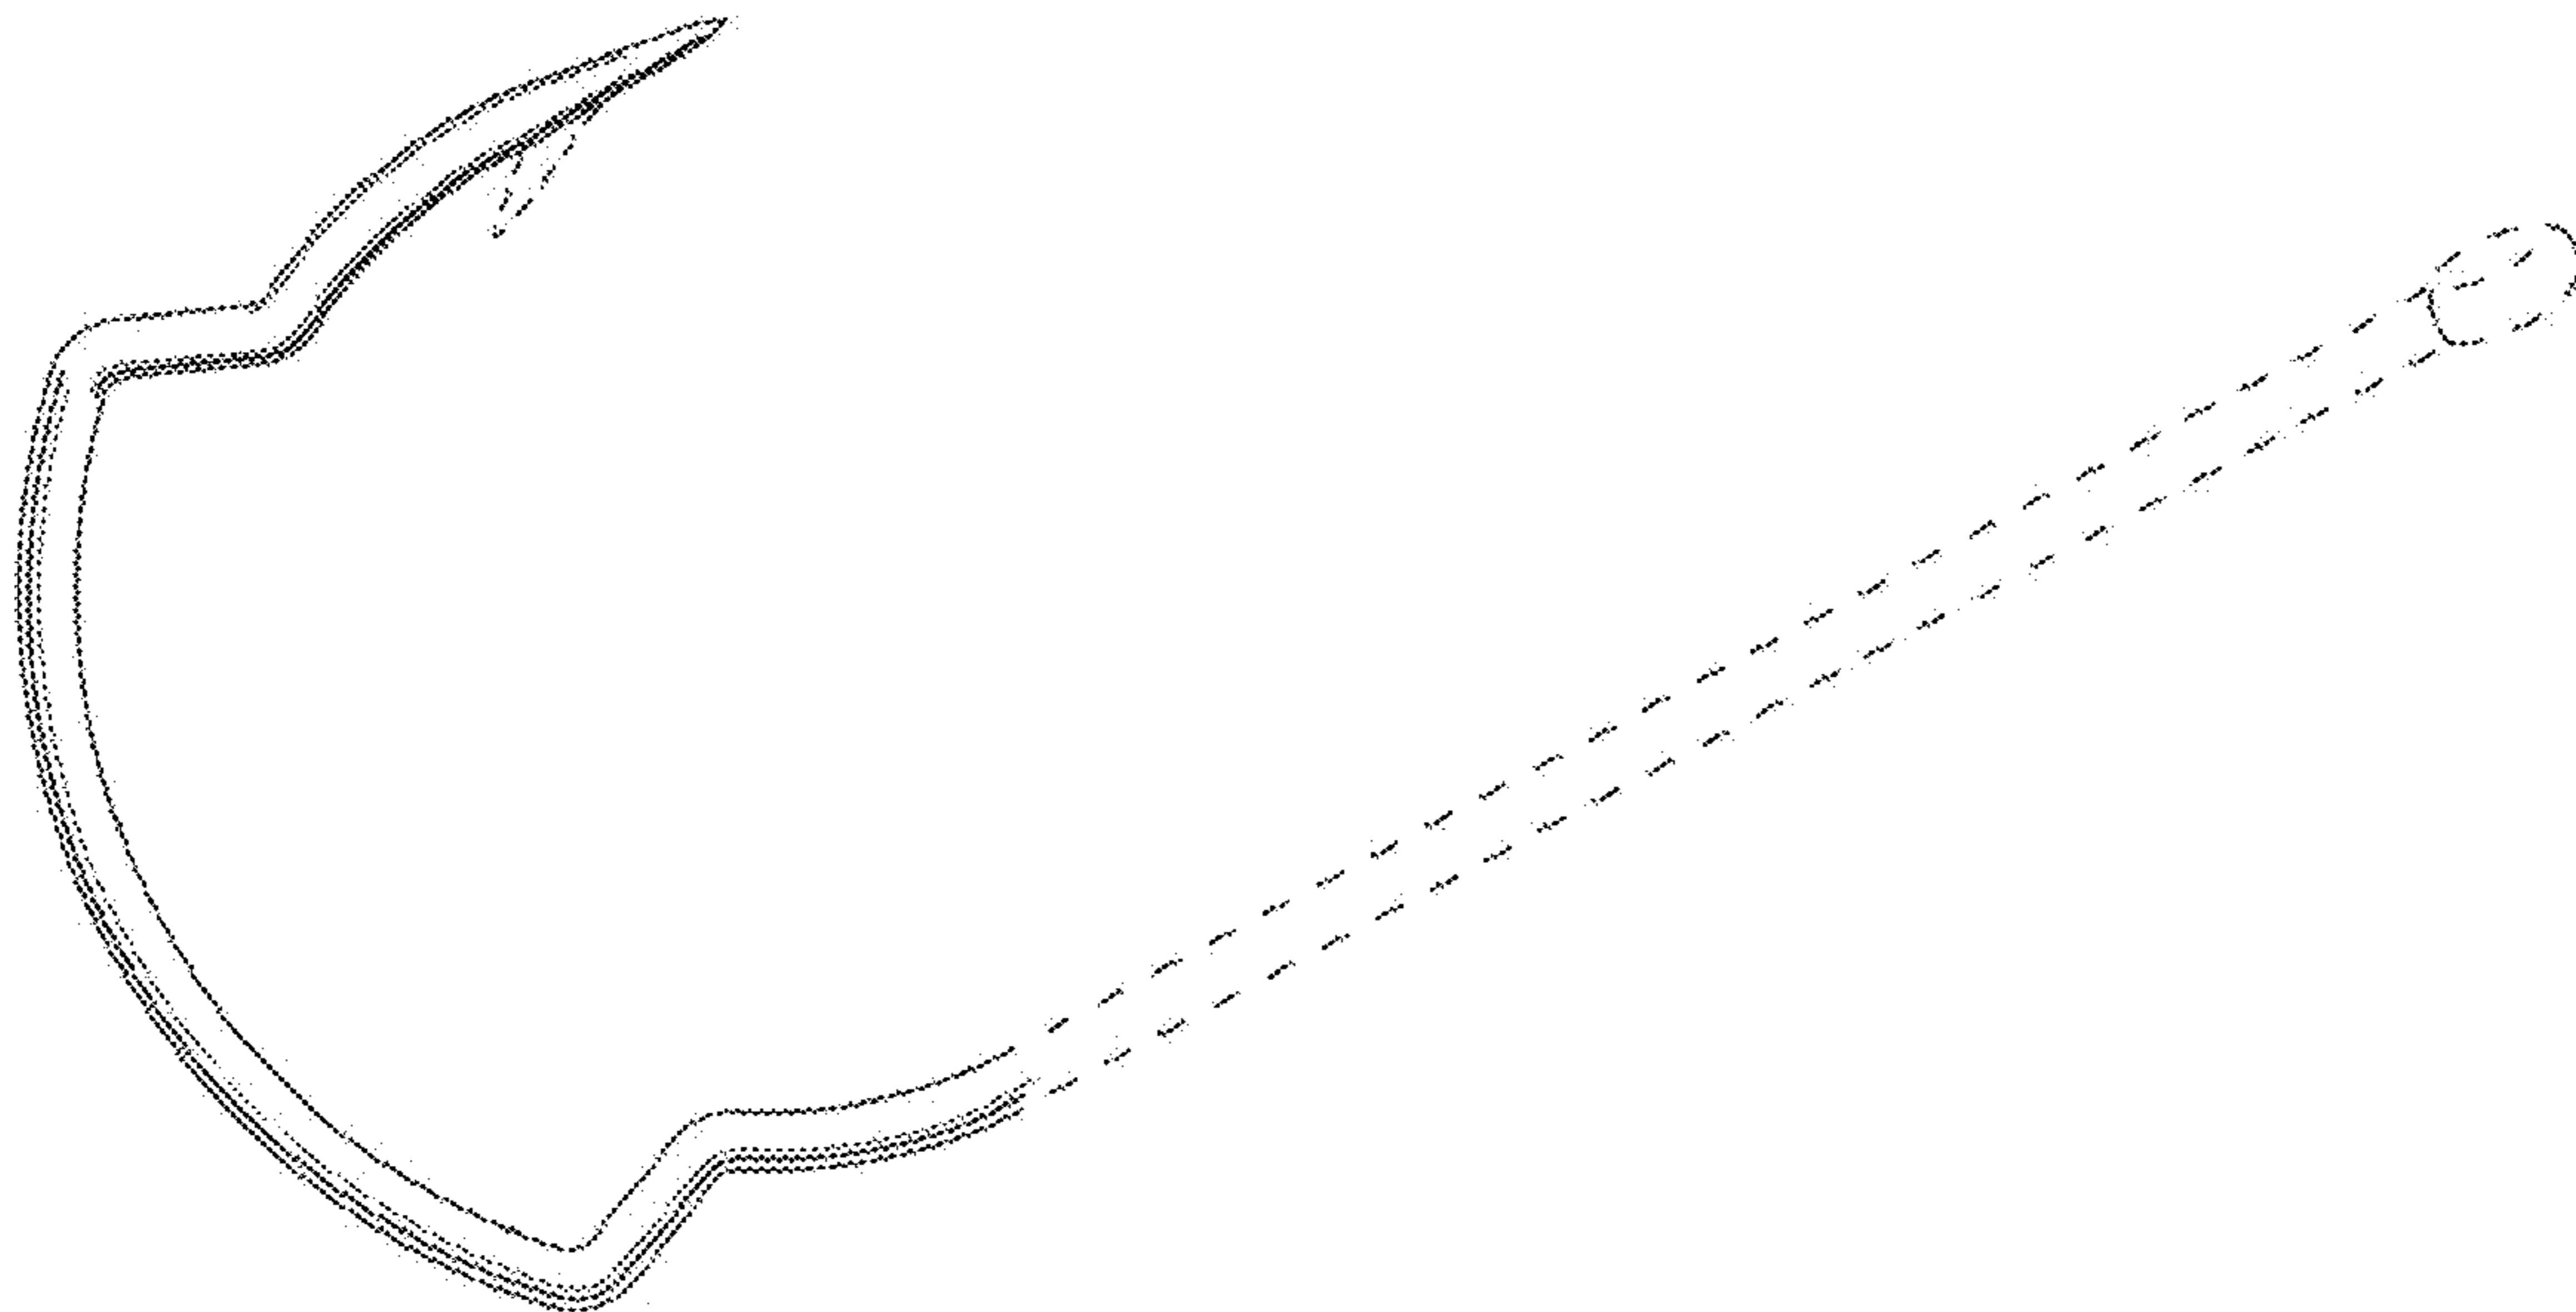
is a first side view of the double kink fishing hook of FIG. 1.
